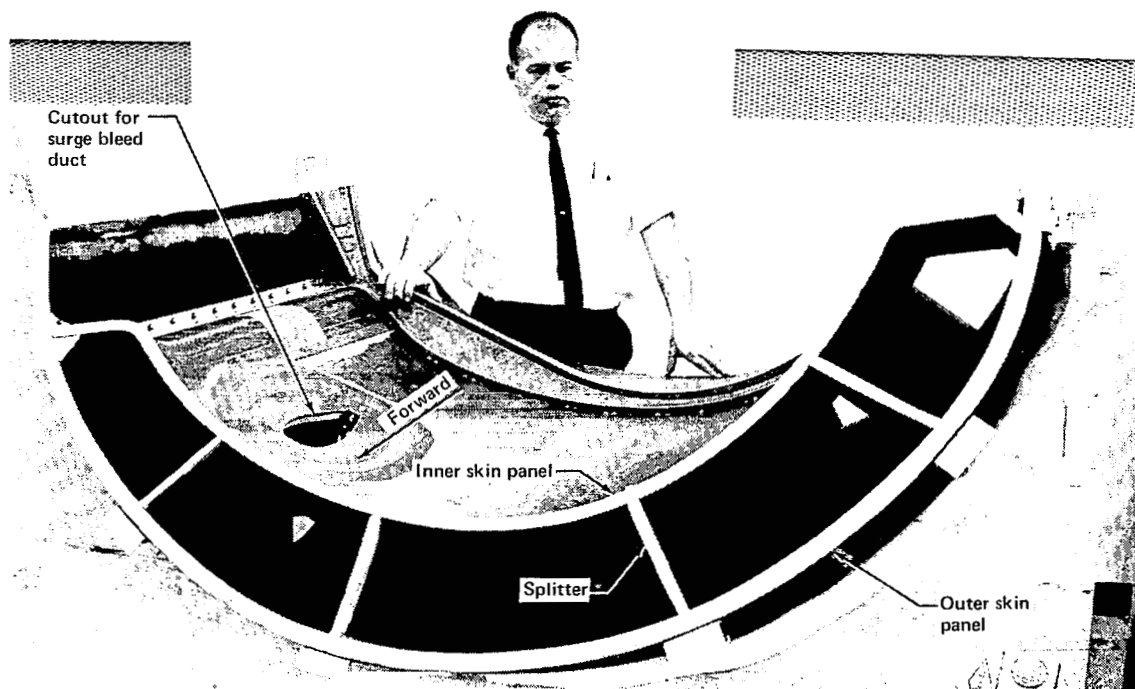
WRAP COWL DUCT POLYIMIDE ASSEMBLY
